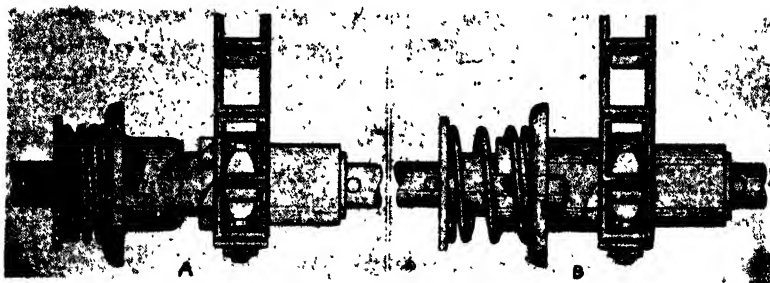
Positive-type clutch: A, clutch parts disengaged; B, clutch parts engaged to transmit power.
